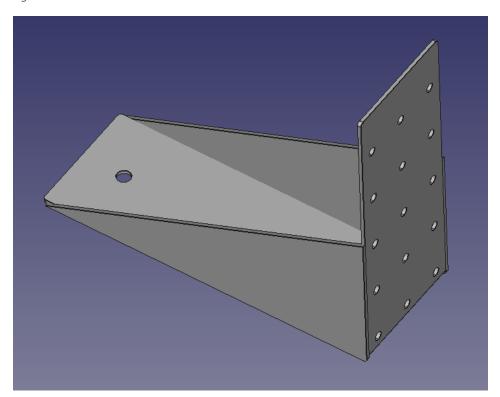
Extended HS1200 Wall Mount Bracket Used on Plastered Walls
